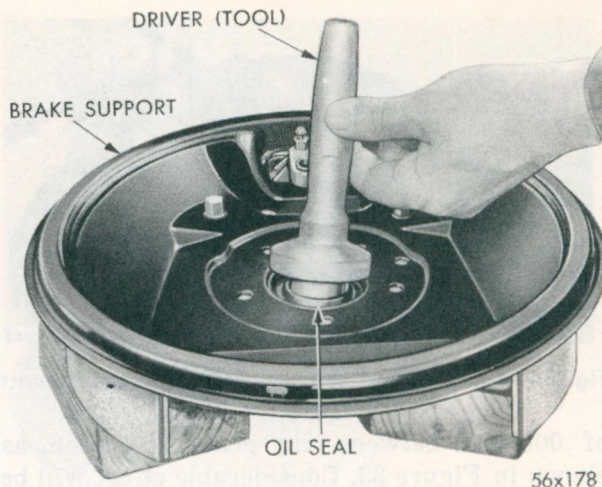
Removing or Installing Outer Oil Seal with Tool C-839
